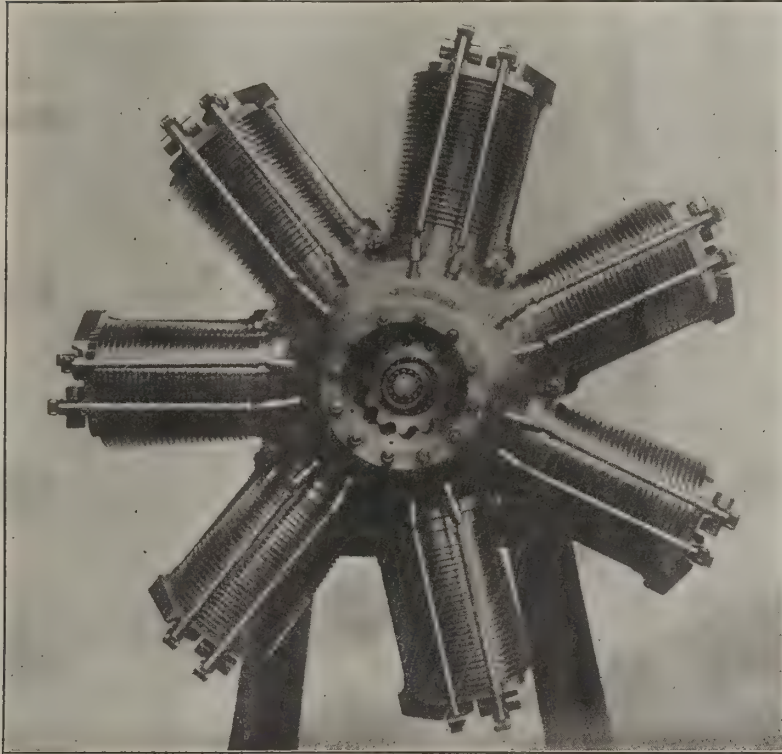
50-60 H.P. Clerget Revolving Engine Showing the Gearing by Which the Spider in Fig. 13 Is Rotated
